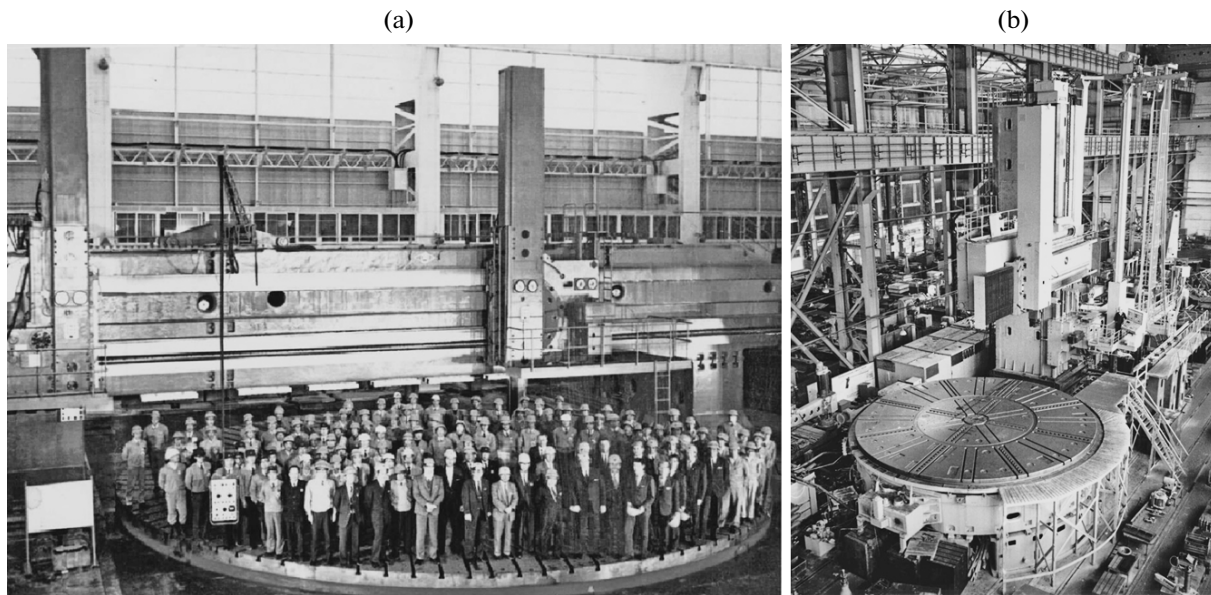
KU 299 (a) and KU 466 (b) turret lathes.
